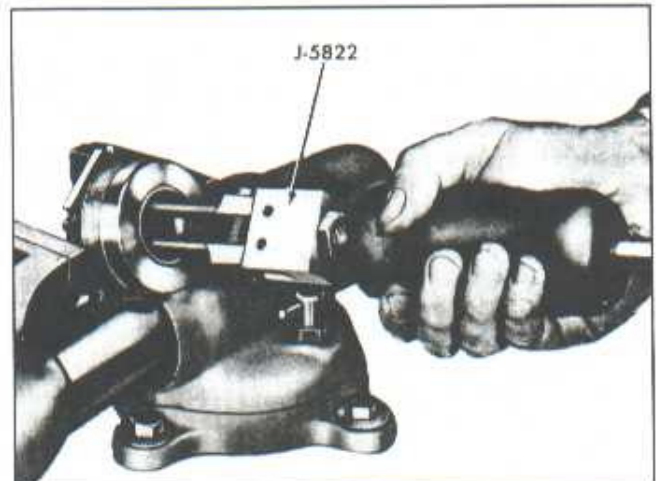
B-9—Removing Adjuster Plug Bearing Race
